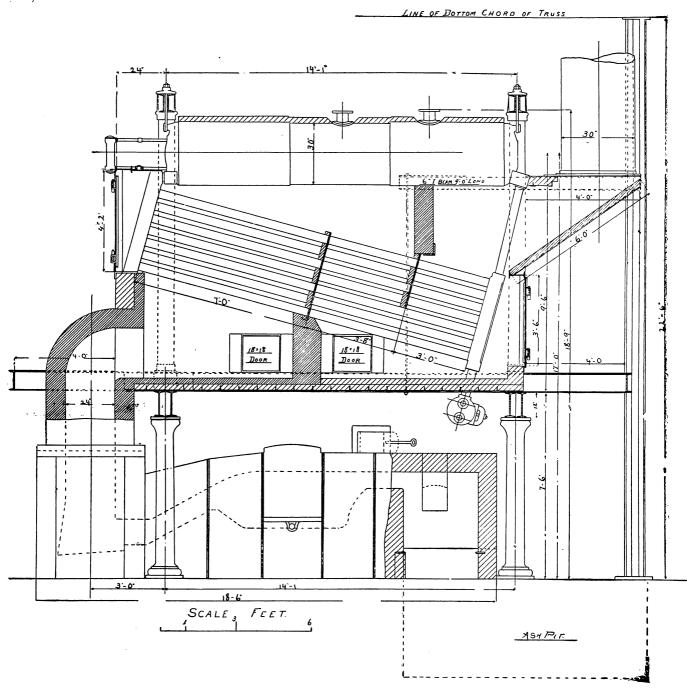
Longitudinal Section Babcock & Wilcox Boiler Over Puddling Furnace.—Oliver Iron & Steel Company, Pittsburgh.
